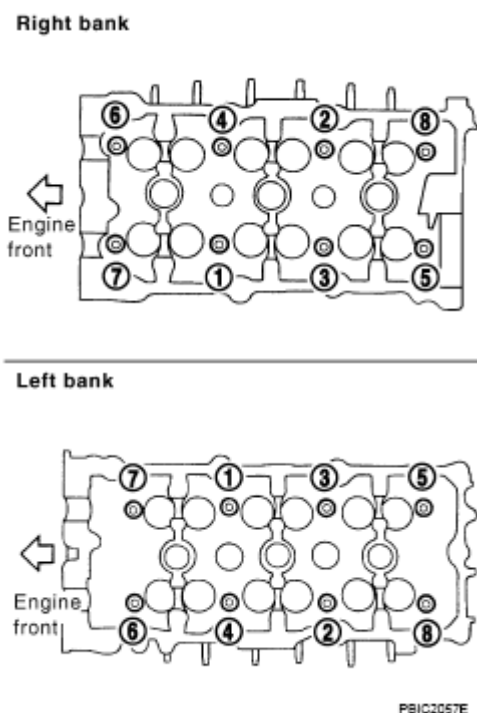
Identifying Cylinder Head Bolts Tightening Sequence
